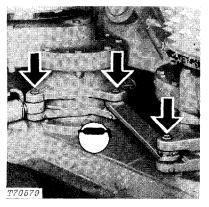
Feed Roll Cylinder Rod End Pivot and Feed Roll Crosslink (3 Points)
